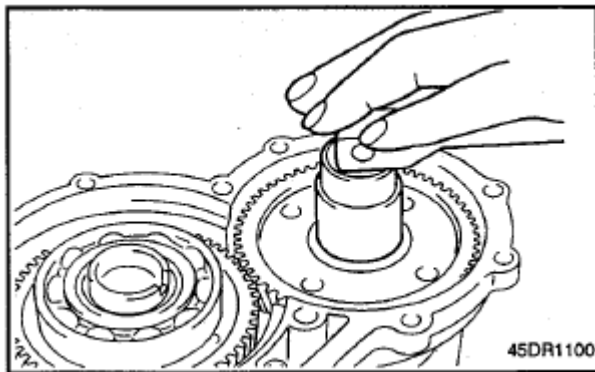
Pressing Transfer Driven Gear To Transfer Shaft
